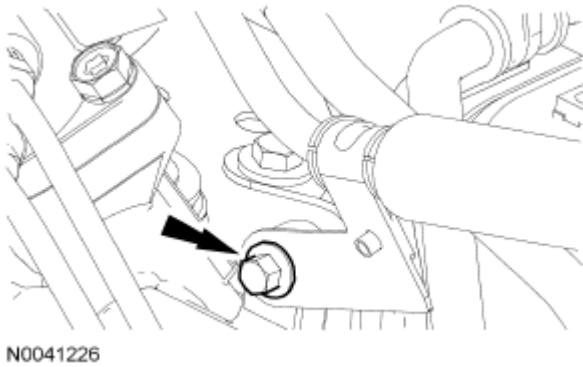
Locating Power Steering Pressure (PSP) Hose Bracket Bolt
